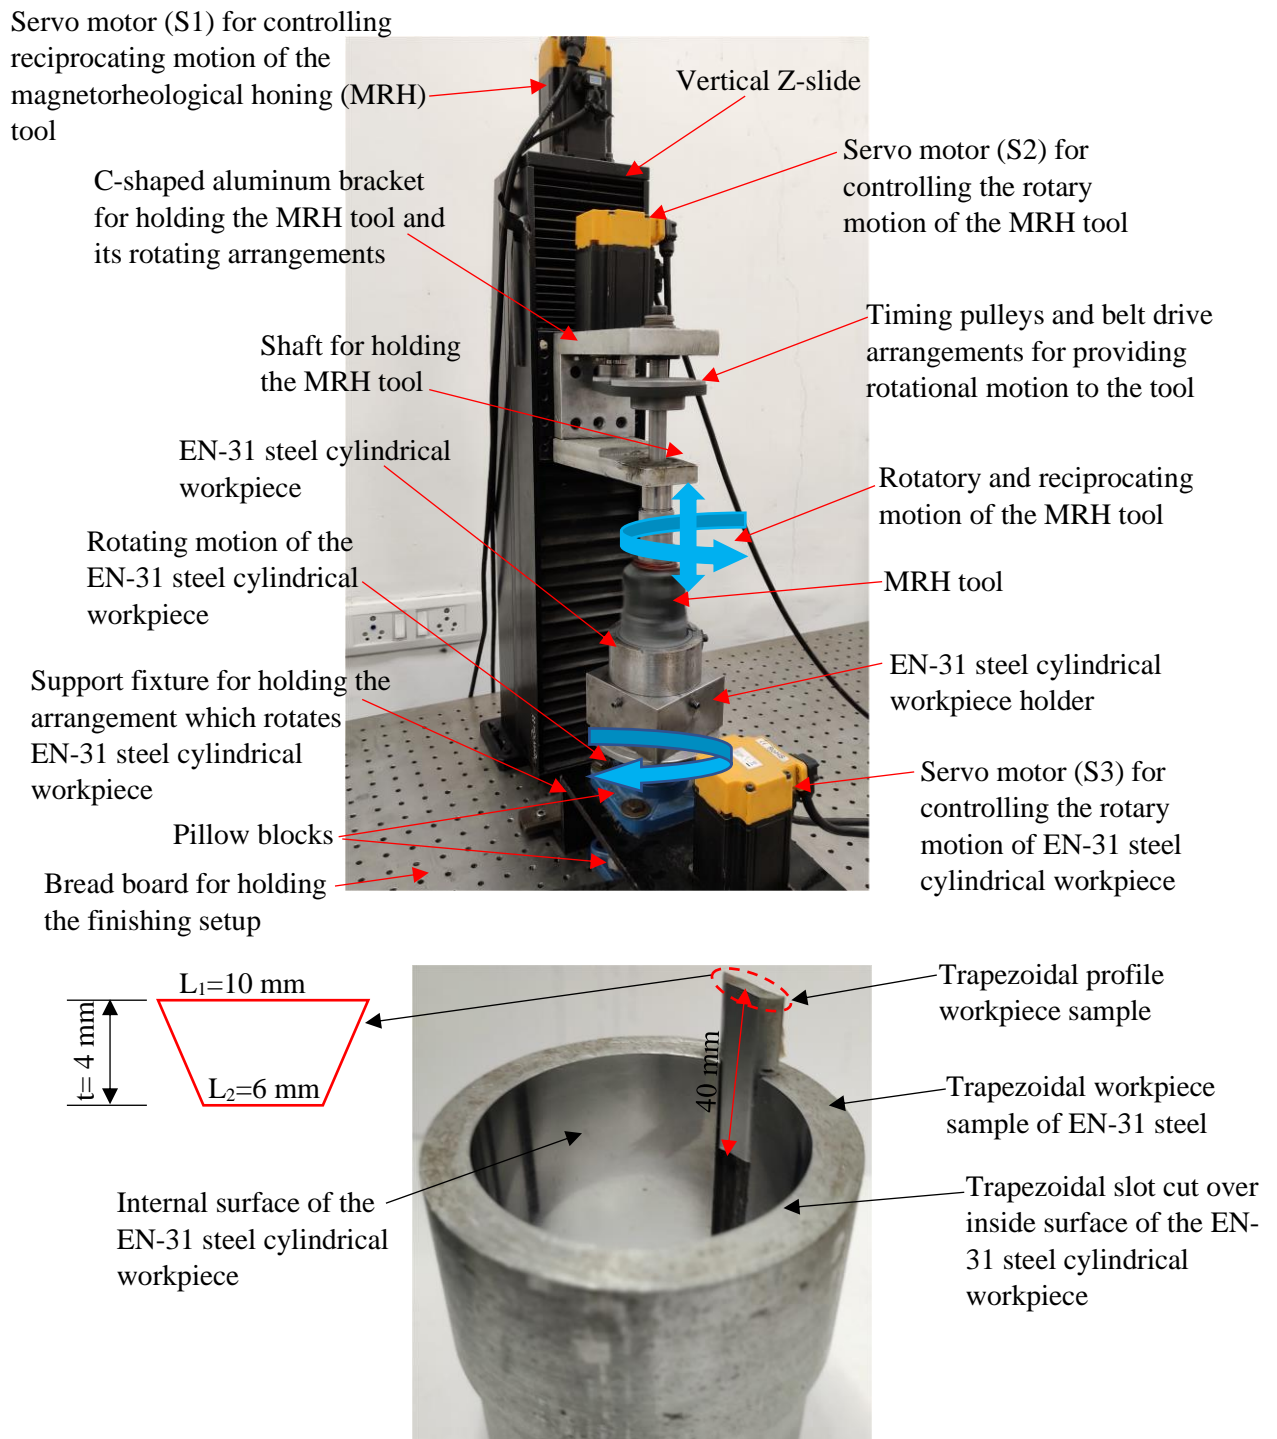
Finishing setup of rotational magnetorheological honing (R-MRH) process for finishing the internal surface of EN-31 steel cylindrical workpiece and its enlarged view.
